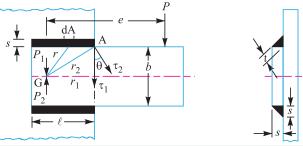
Eccentrically loaded welded joint.
